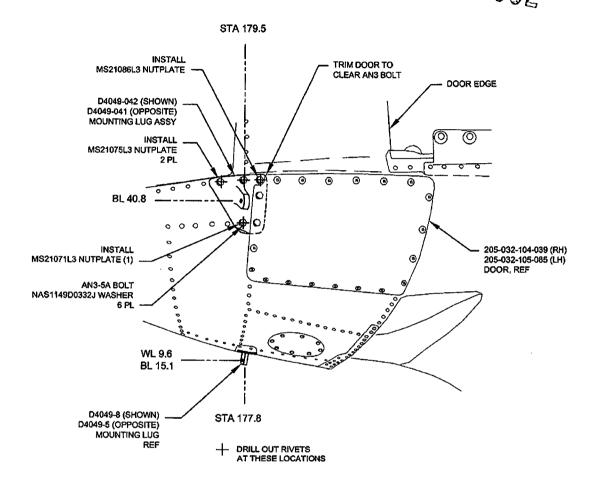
Section K-K (New Hard Point Installation at STA 179.5)
